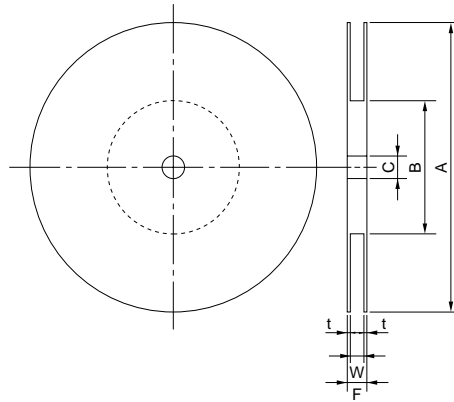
(A). MP-3Z Reel Dimensions (embossed-type taping)
